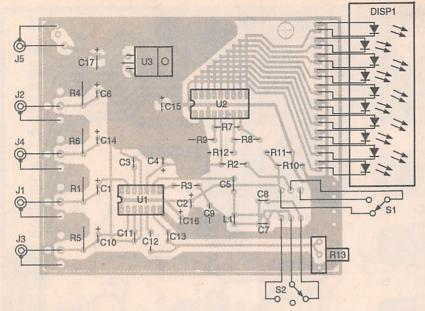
Use this parts-placement diagram when assembling the Universal Noise Reduction System.
